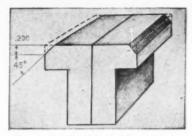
Details and dimensions of the workpiece being machined in Fig. 3.
